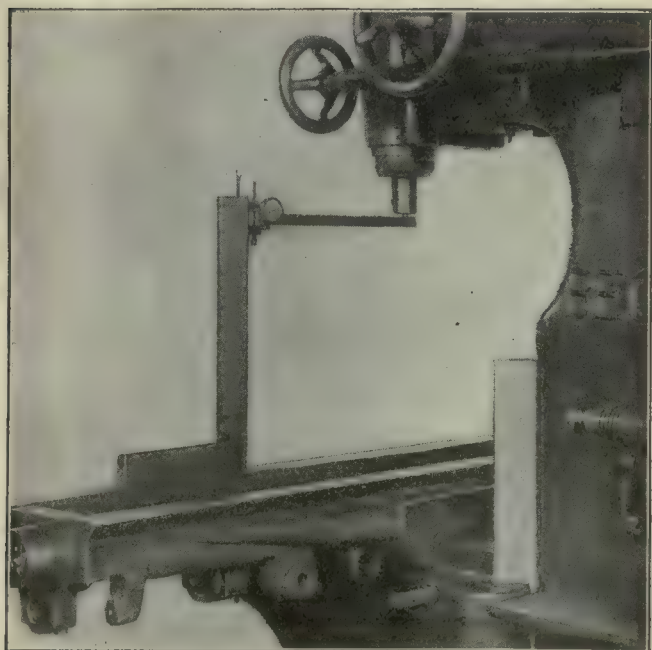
TESTING ALIGNMENT OF COLUMN SLIDE WITH SPINDLE
